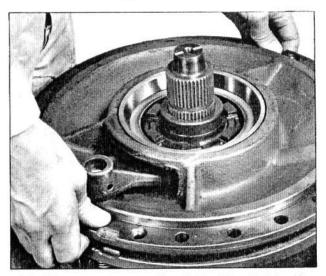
Removing or Installing Carrier Plate (Diff. Lock)
